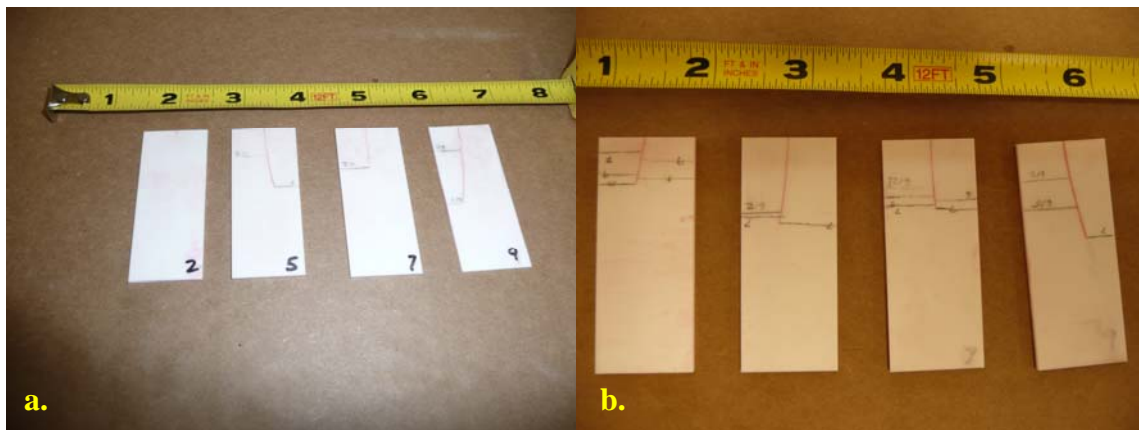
Ceramic alumina specimens (cracked) (a) front and (b) back. Cracks highlighted on specimens with red dye penetrant.
